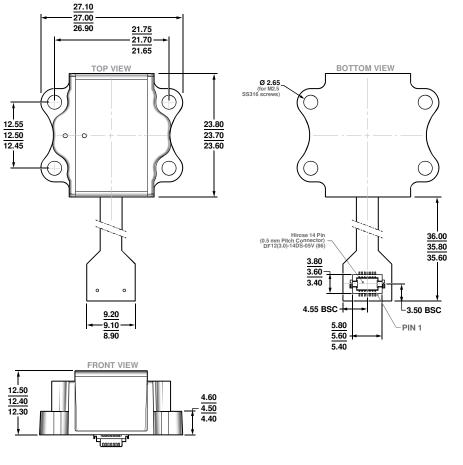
14-Lead Module with Integrated Flex Connector [MODULE] (ML-14-7) Dimensions shown in millimeters
